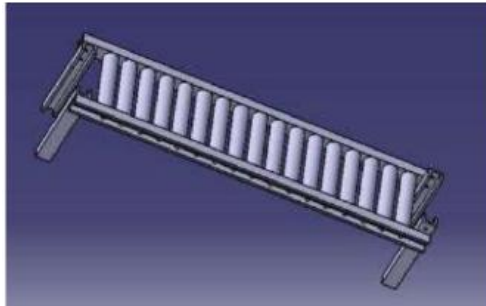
Geometrical Modelling of Roller conveyor done with CATIA
